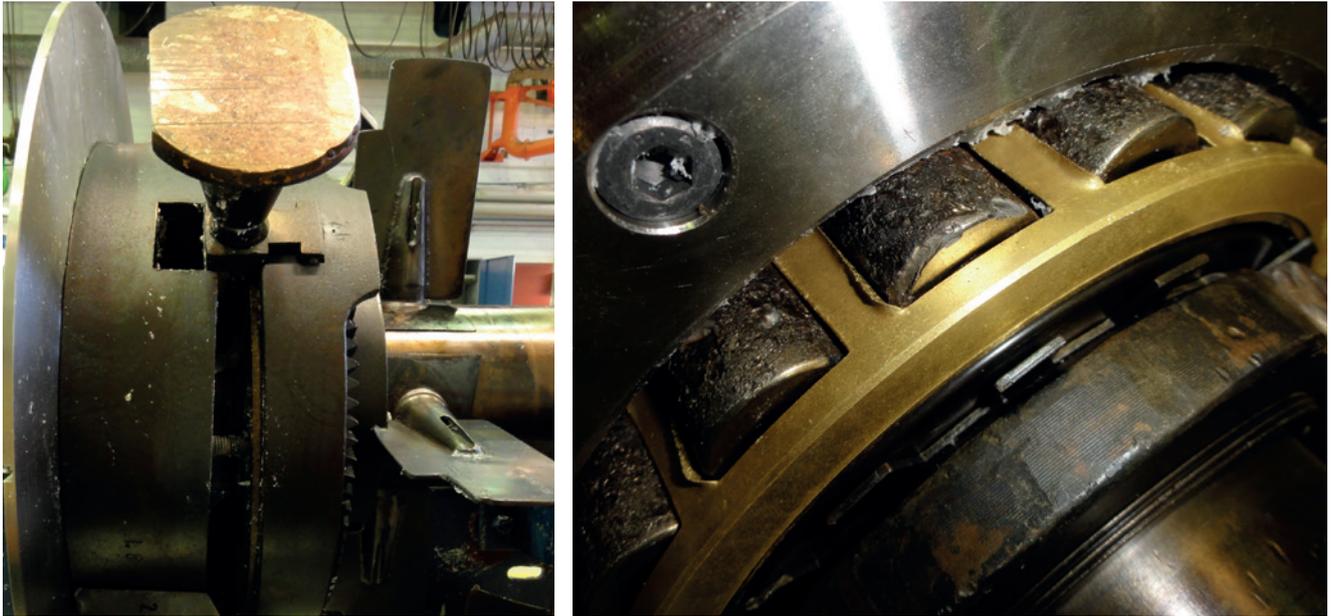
View of the damaged middle bearing of the reactor mixer, showing the fractured bearing housing (left) and the bearing rolling elements (right). The detection and diagnosis of this bearing fault is described in Part 2 of this article series.
